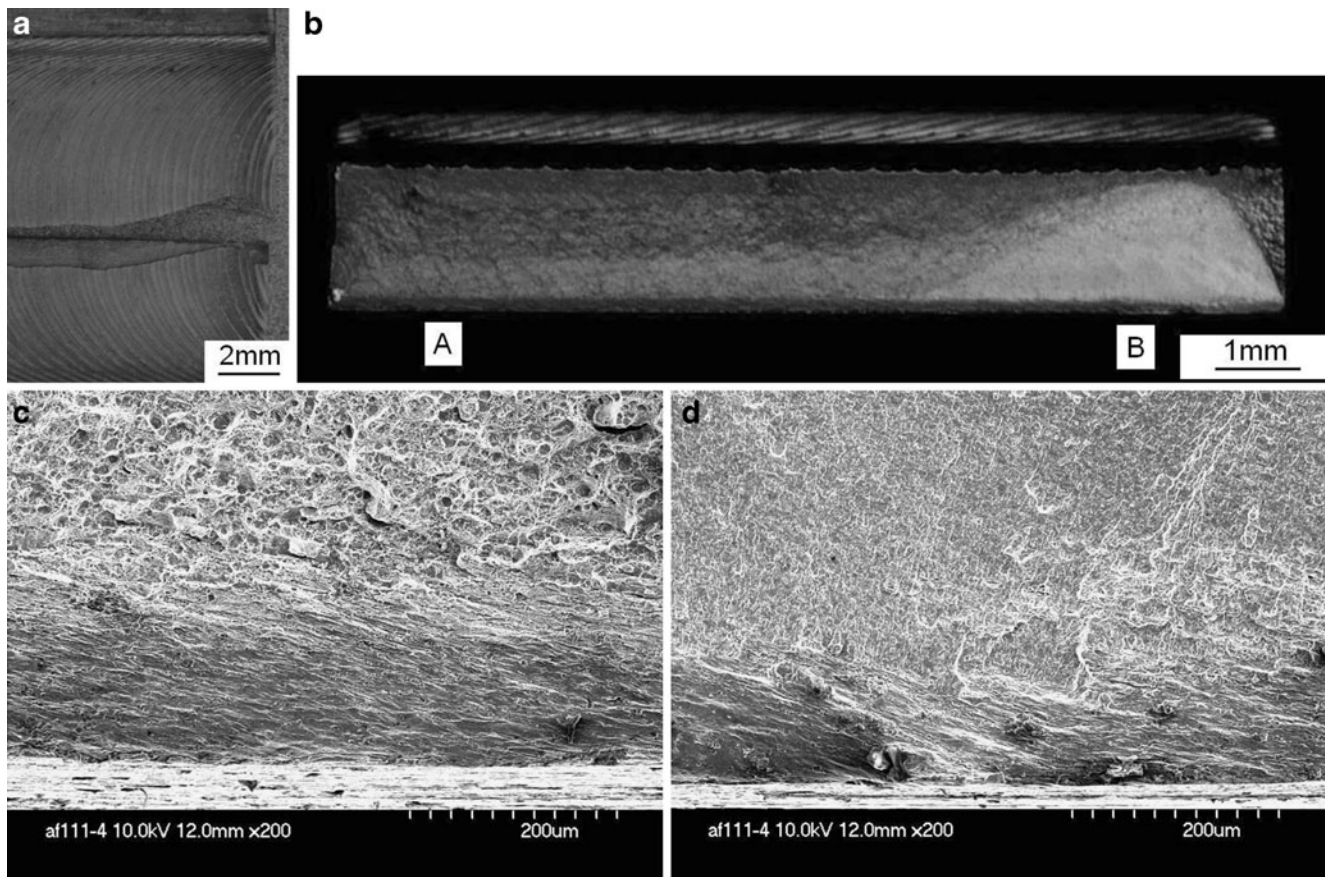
Typical fracture surface when LOP is the crack origin. a Fracture location. b Fracture surface. c Fracture surface at point A. d Fracture surface at point B
